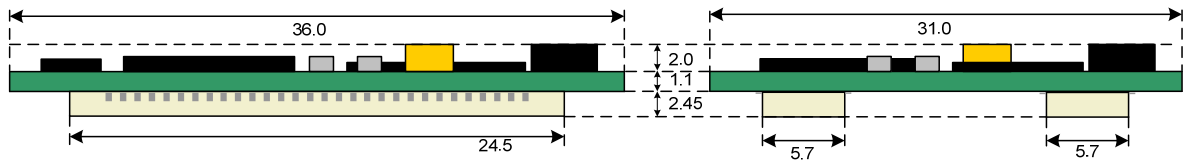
Side View with Connector mounted, 0.5mm tolerances
